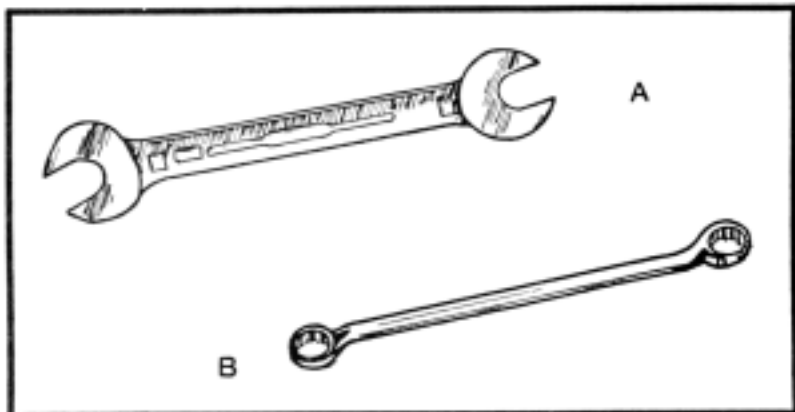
Open-end wrenches are the most basic (view A), but need to be shortstopped by box-ends (view B).
